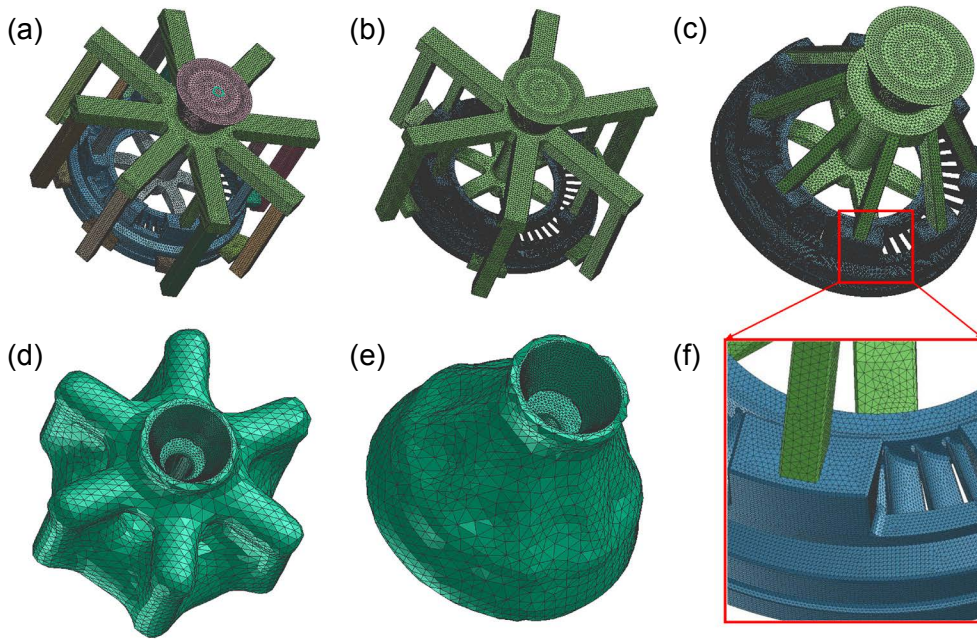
Finite element mesh of turbine nozzle casting with different gating systems (a)–(c), meshes of casting mold shell (d) and (e), and local details of the non-uniform mesh (f)
